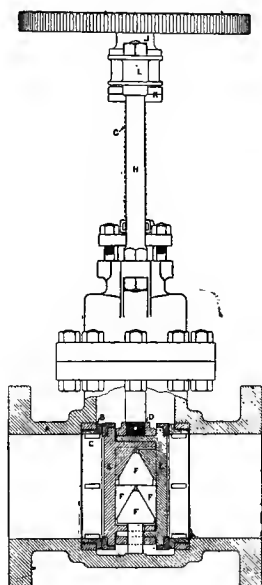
SECTION OF "FULLWAY" VALVE.
